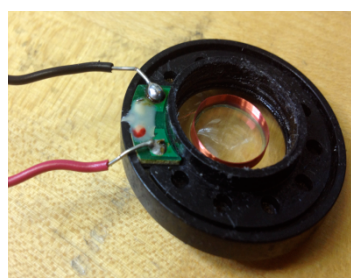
A 300 Ω , 40 mm speaker is shown with electrical wires soldered to its solder terminals.
